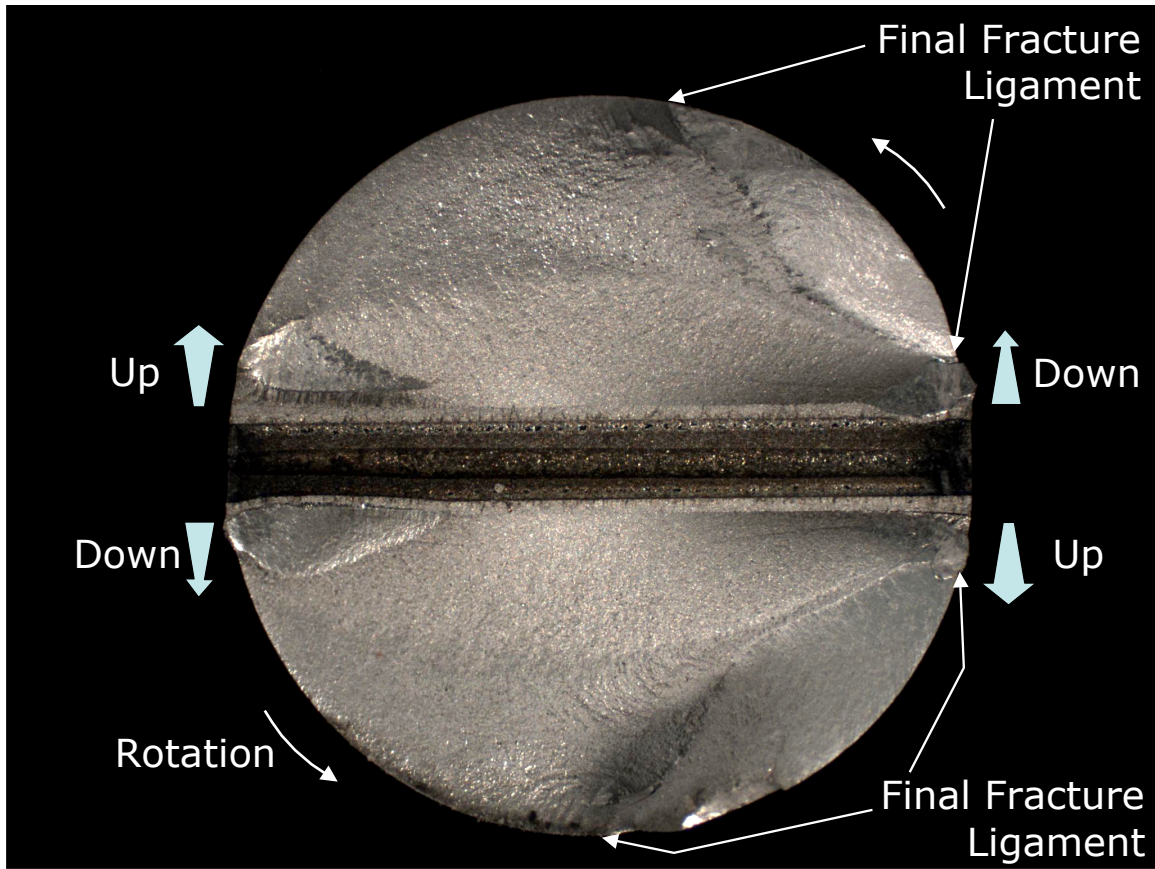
Bottom fracture surface of ITCR #3 (180° out-of-phase). Triangular regions above and below left side of pre-crack are smearing from crack surface contact; similar damage is present but less visible on right.
